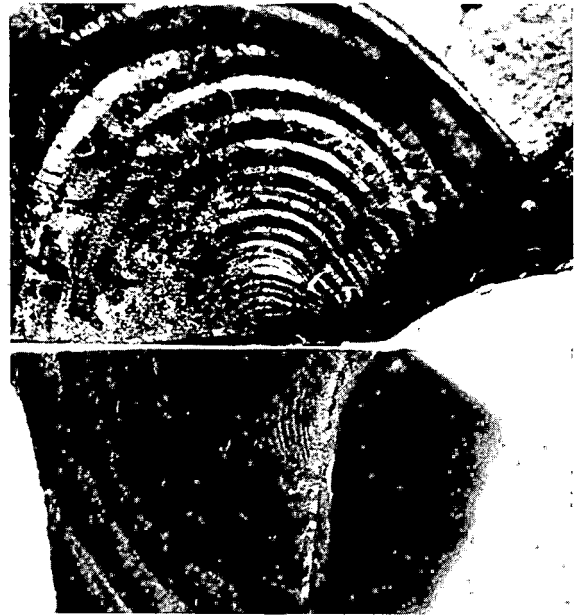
PLANT WELD FAILURE TRANSVERSE VIEW.
